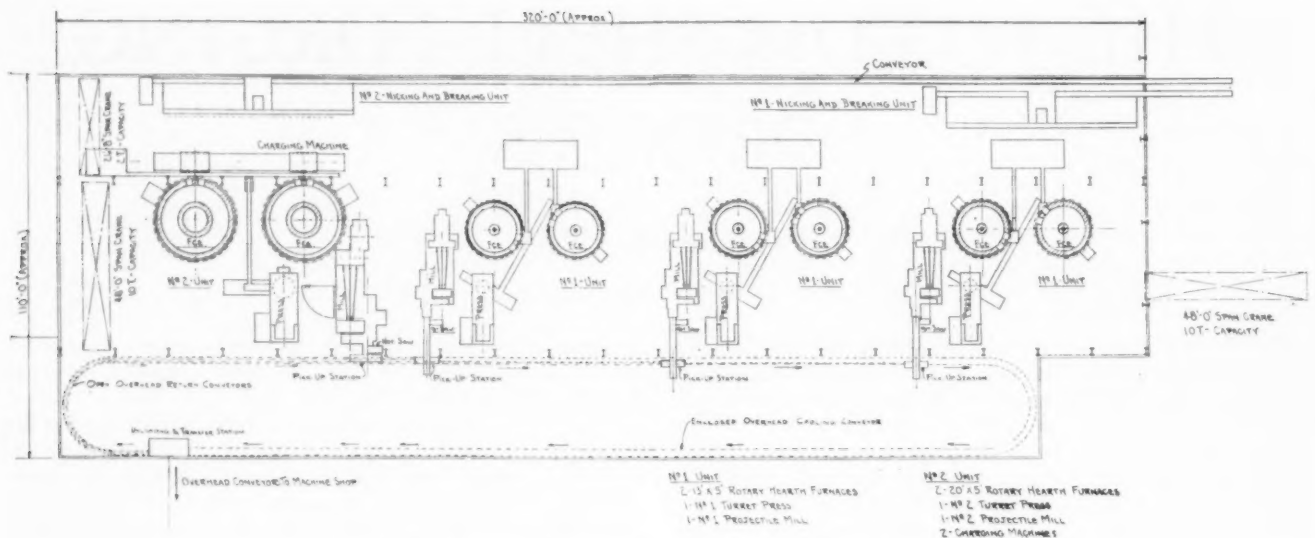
LAYOUT OF SHELL-FORGING PLANT FOR WITTER PROCESS
